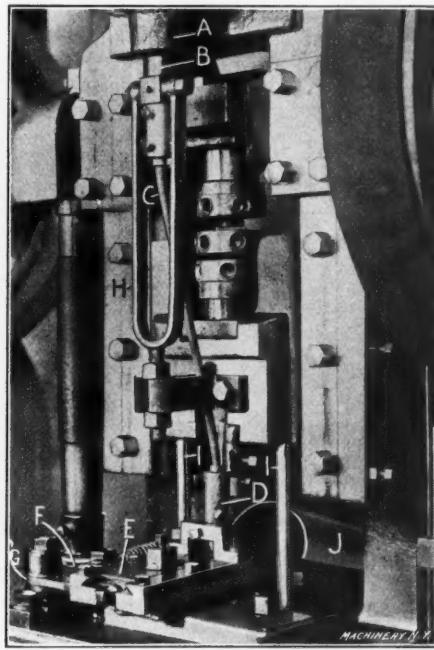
Automatic Swaging Machine which forms the Slug into a Bullet
